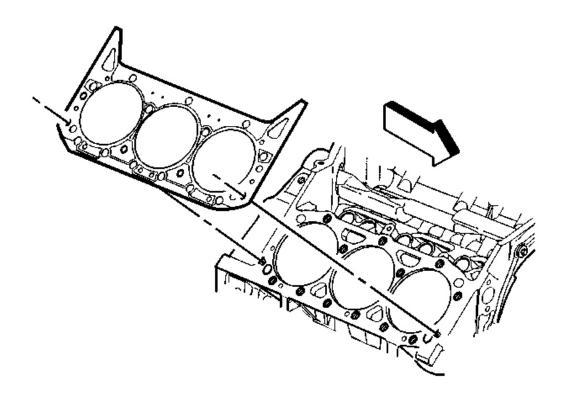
View Of Cylinder Head Gasket And Alignment Pins - Right Courtesy of GENERAL MOTORS CORP.
